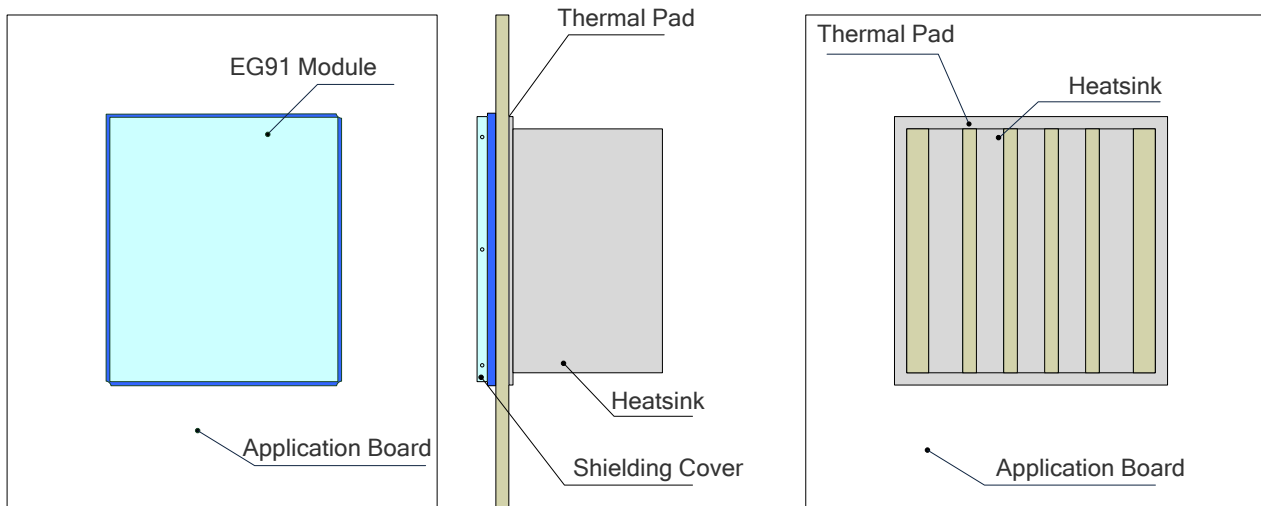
Referenced Heatsink Design (Heatsink at the Bottom of Customers' PCB)
